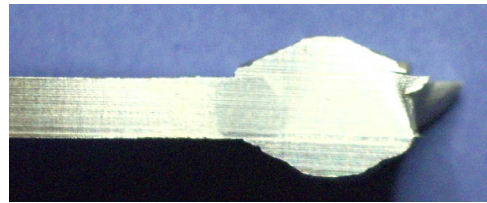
MIG welding specimens with the overfill milled.
